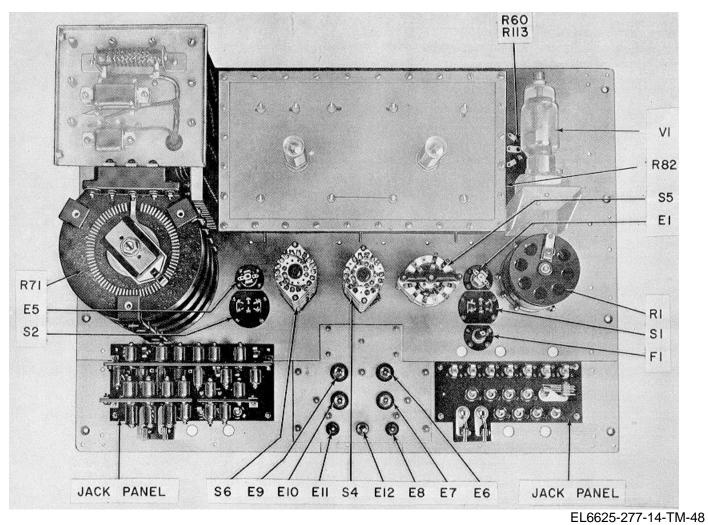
Meter Test Set TS-682/GSM-1, rear view of front panel.
